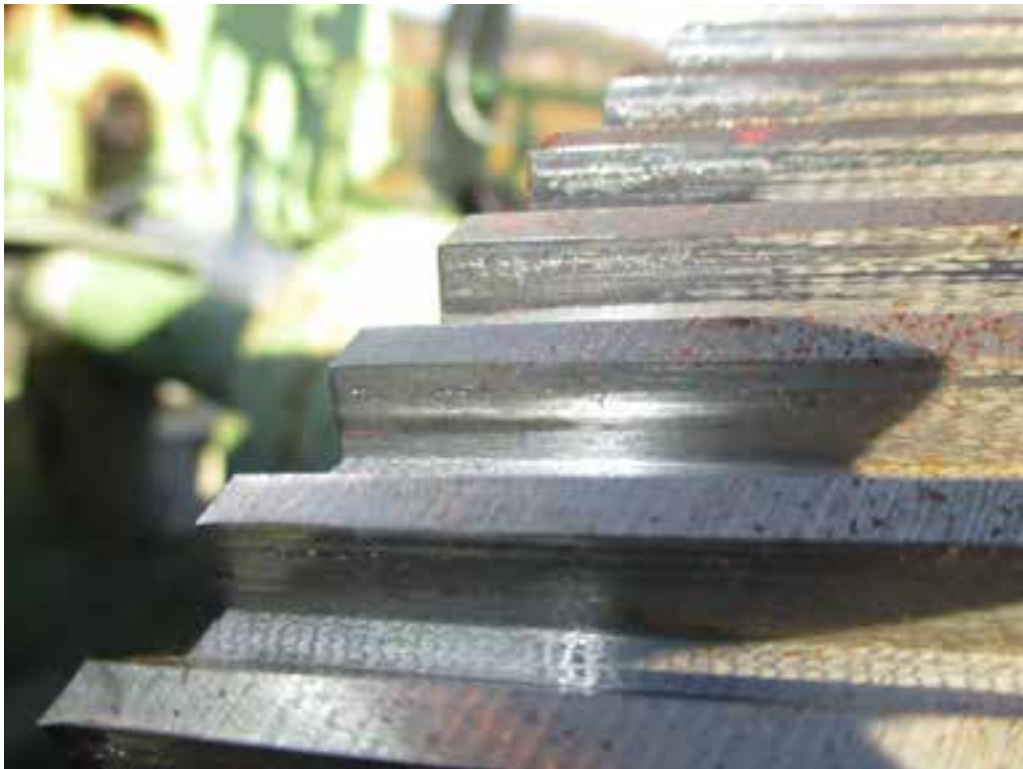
South Primary Reducer. View of west first reduction gear set, opening face of gear teeth. Closeup view of photo 16.
